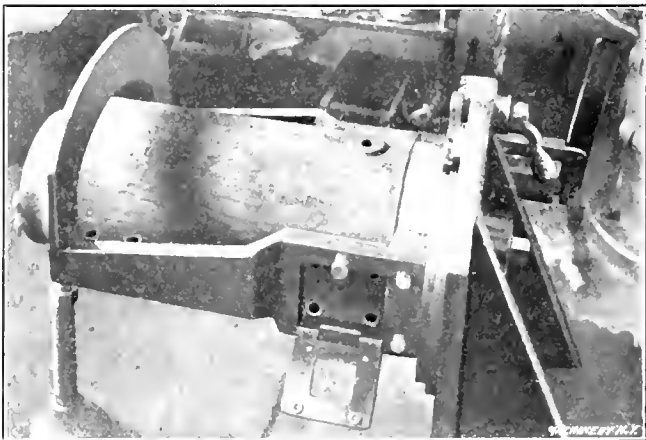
Cylinder Mounted in Indexing Jig in which the Various Holes are drilled and tapped
